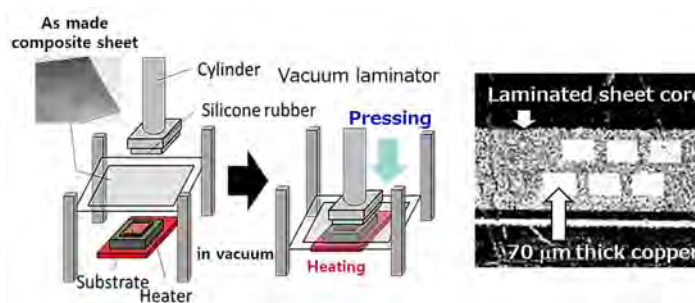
Example of forming a composite sheet magnetic core using a vacuum hot press laminator and cross sectional structure of a double-layer conductor embedded in a composite sheet magnetic core, based on Ref. (59)
